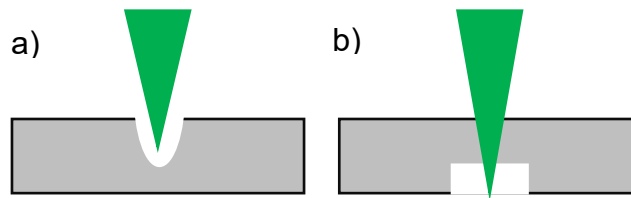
Laser milling strategies: a) top-down and b) bottom-up milling.
